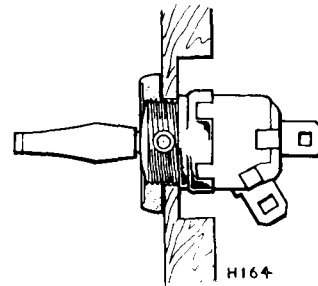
Heater blower switch (1200, 12/50 and Vitesse 6)
